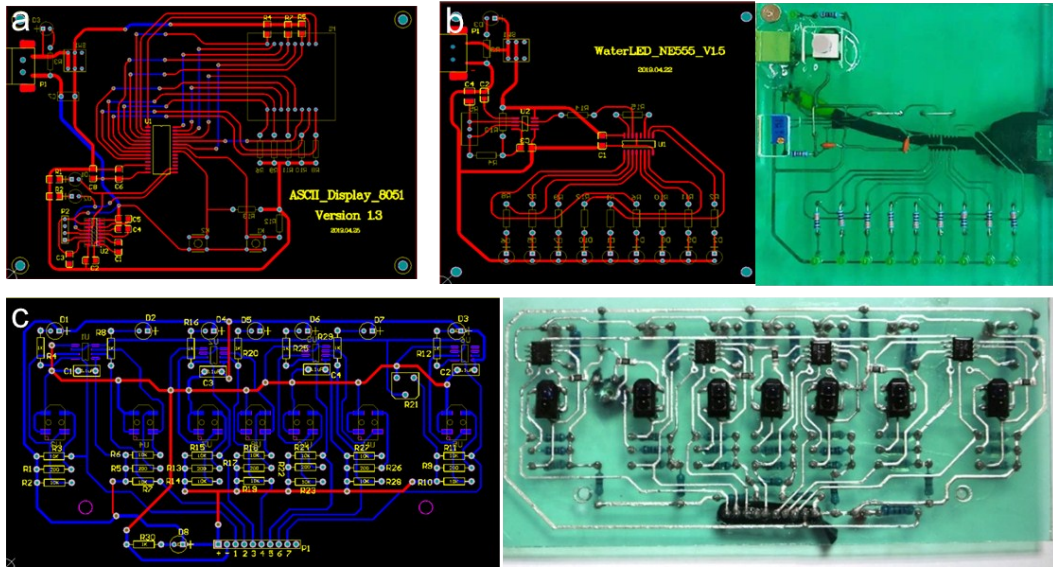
More double-layer circuit boards and their PCB design drawing fabricated by the solidified circuit printing method with low-melting metal. (a) PCB design drawing of the LED digital display circuit based on an 8051 microchip. (b) A double-layer circuit of flowing water light and its PCB design drawing. (c) A double-layer circuit of infrared tracking and its PCB design drawing.
